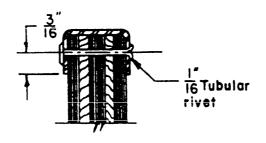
EDGE BINDING CHANNEL SHEET STEEL
